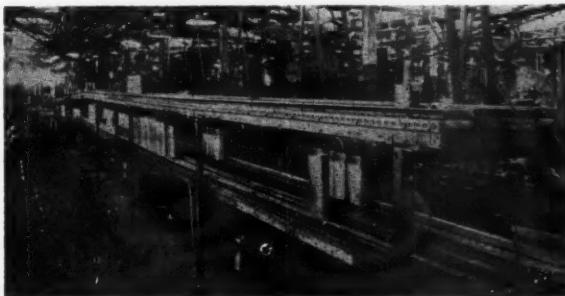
Double-deck, four-track conveyor for valve sleeves
